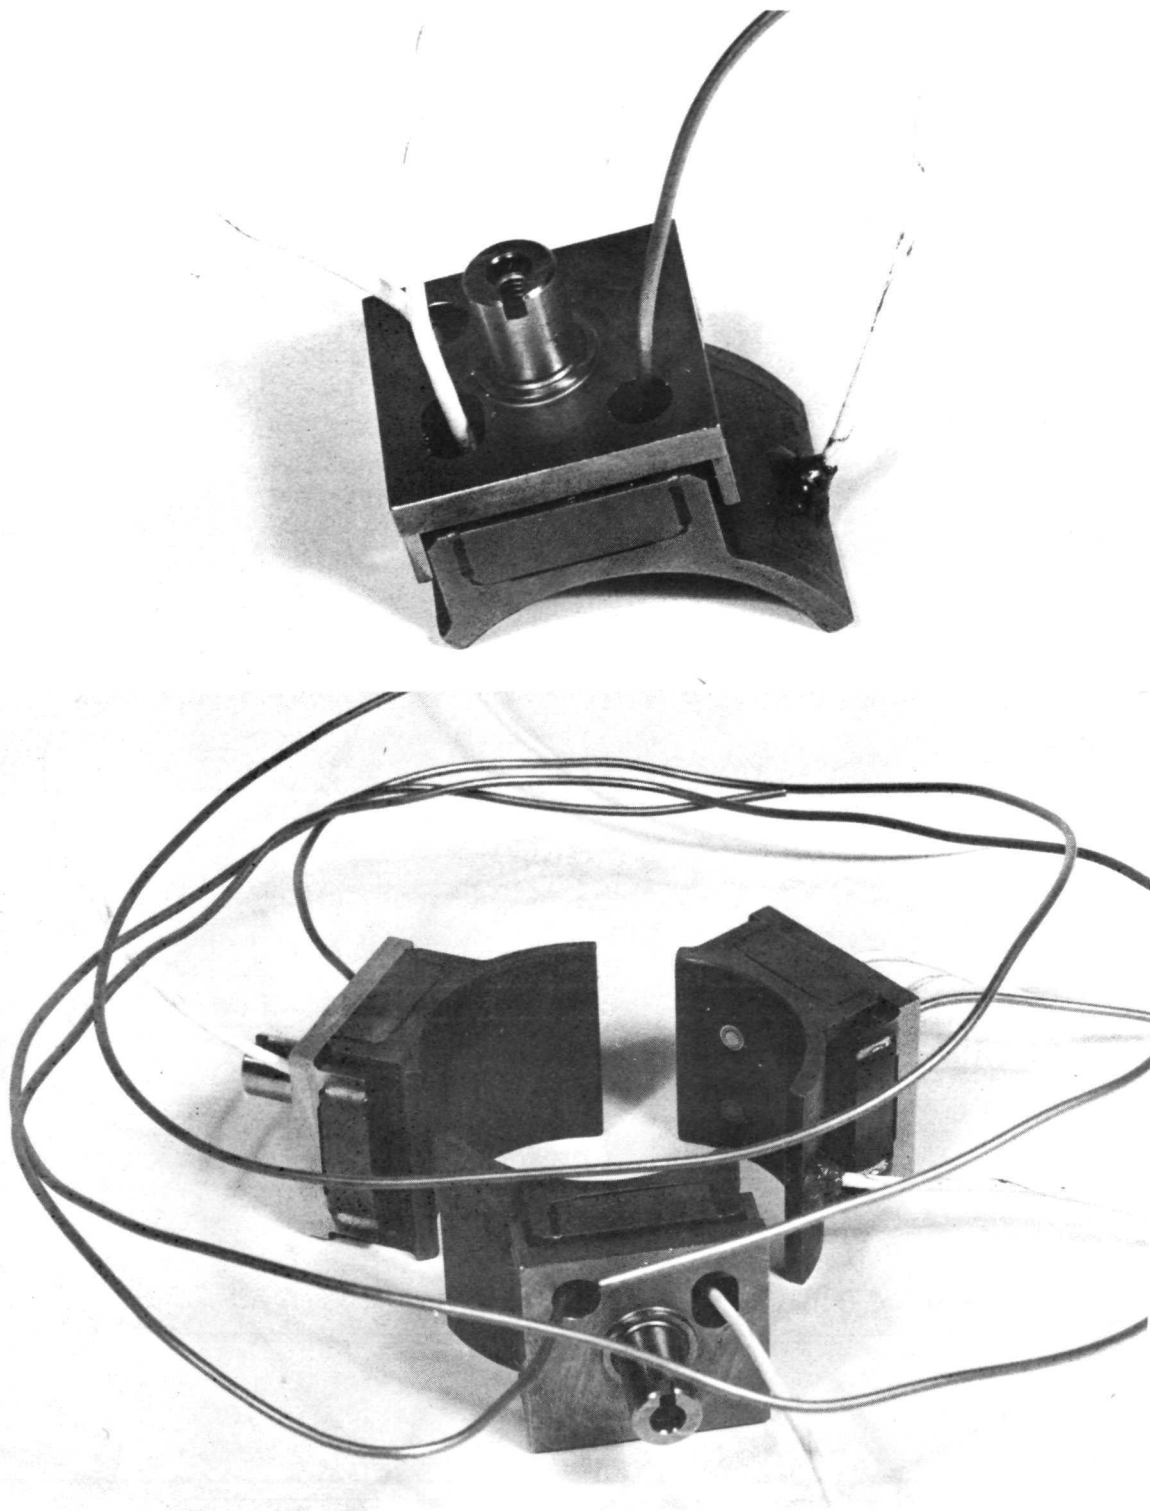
Instrumented, Modified, Cruciform-Supported, Tilting-Pad Pad and Bearing Assembly
